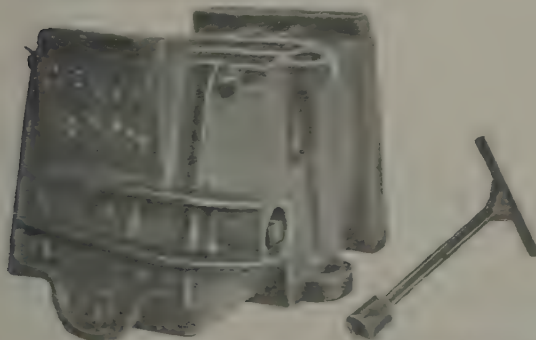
Journal Box Lock Lid, Locked by a Set Screw Bearing Against Side of Box. Flipped Lip Around the Front Opening. Operated by a Special Socket Wrench, in Possession of Train Crew.
